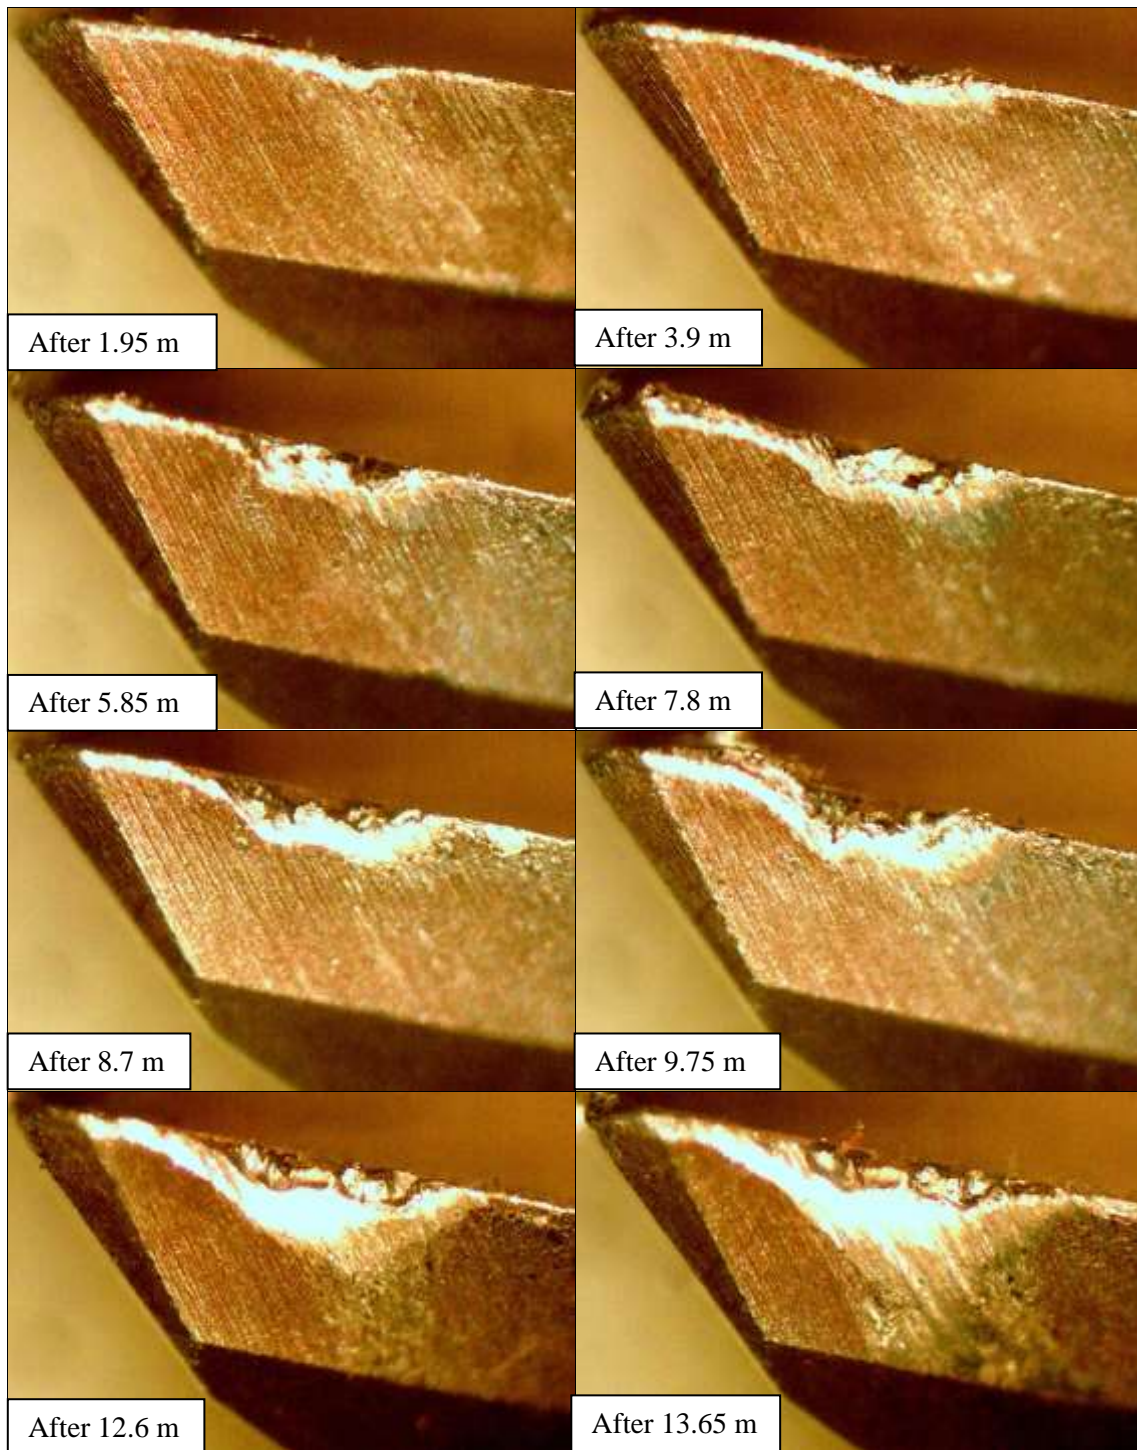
Tool images showing flank wear development until wear criterion for the most affected tooth when machining Ti-6Al-4V at 150 m/min under cryogenic cooling.
